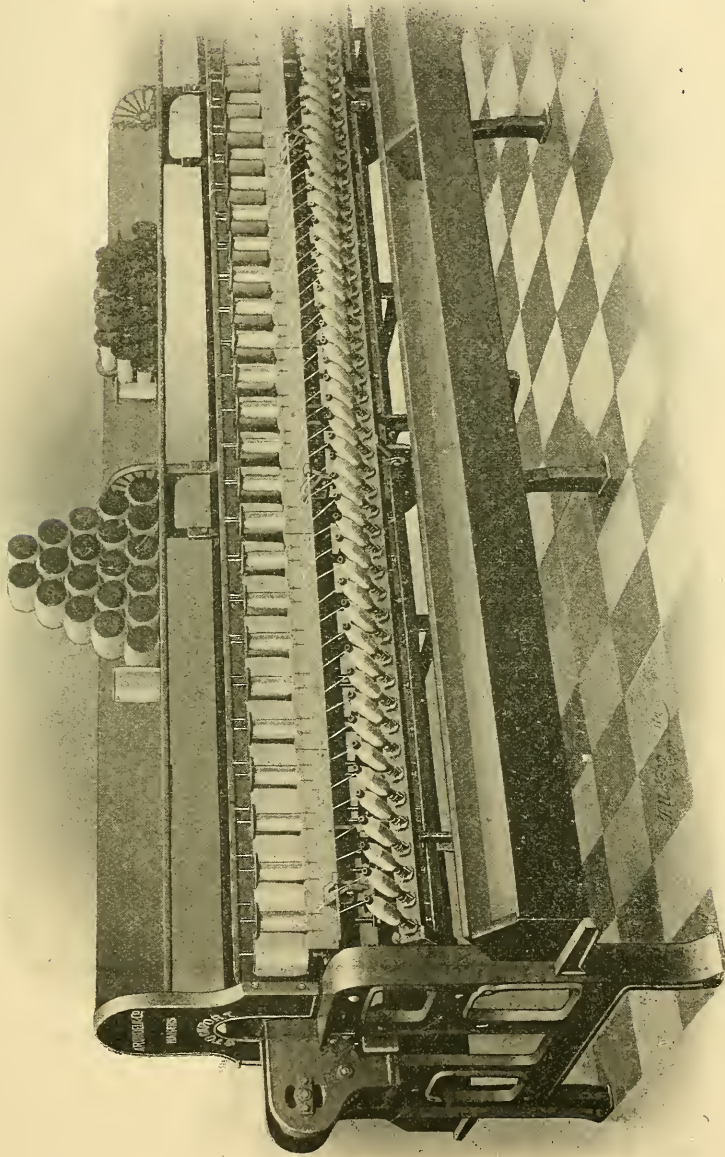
Upright spindle winding frame, with creeper motion for taking away empty bobbins.
